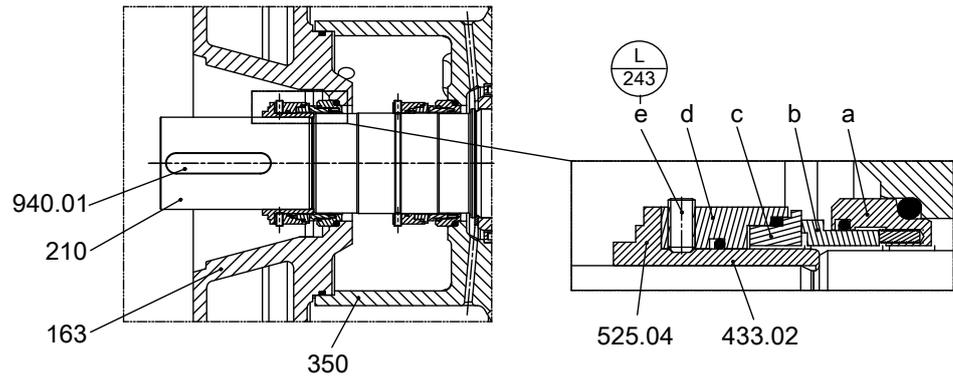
Installing the impeller-end mechanical seal for motors 260 8.N, 300 8.N, 350 8.N
